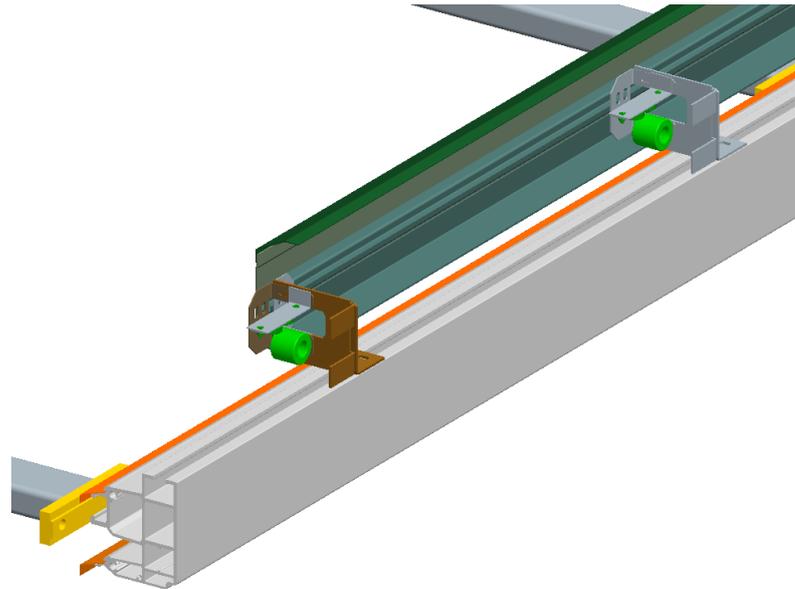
Solution 1, handrail guiding system and fixings for visual panels
